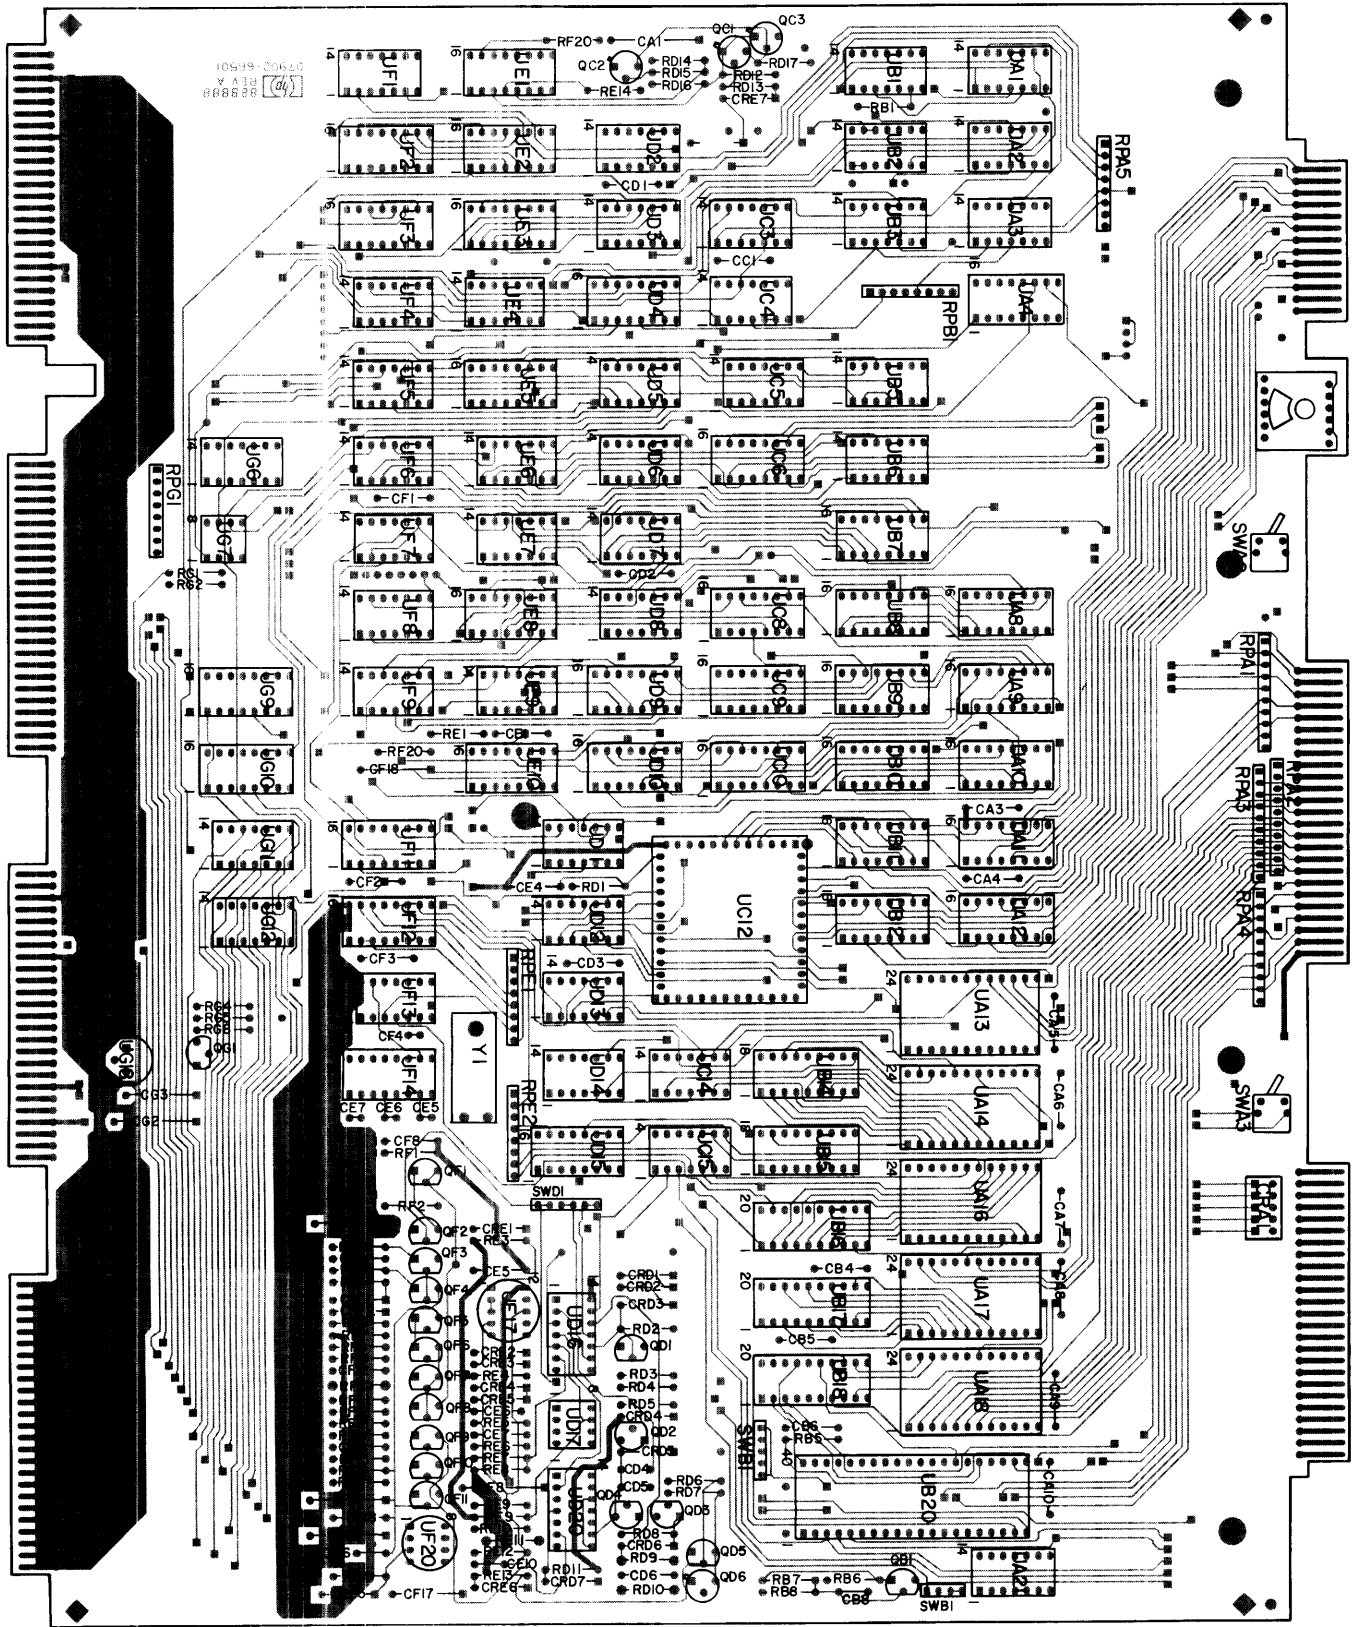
Controller Board A1 (07902-66501) Component Locator
